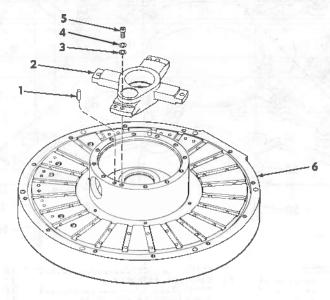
BASE /9015657/-EXPLODED VIEW /SEE FIGURE 44 FOR NEXT HIGHER ASSEMBLY/
